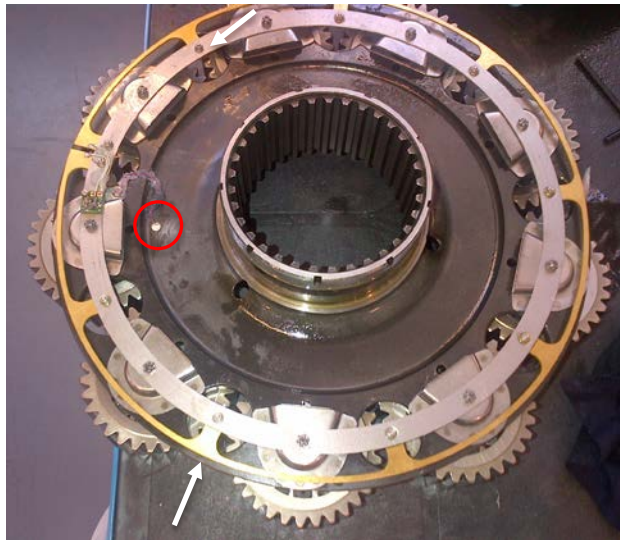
Moving coil mounted on the planetary carrier (coil arrowed, sensor circled)
